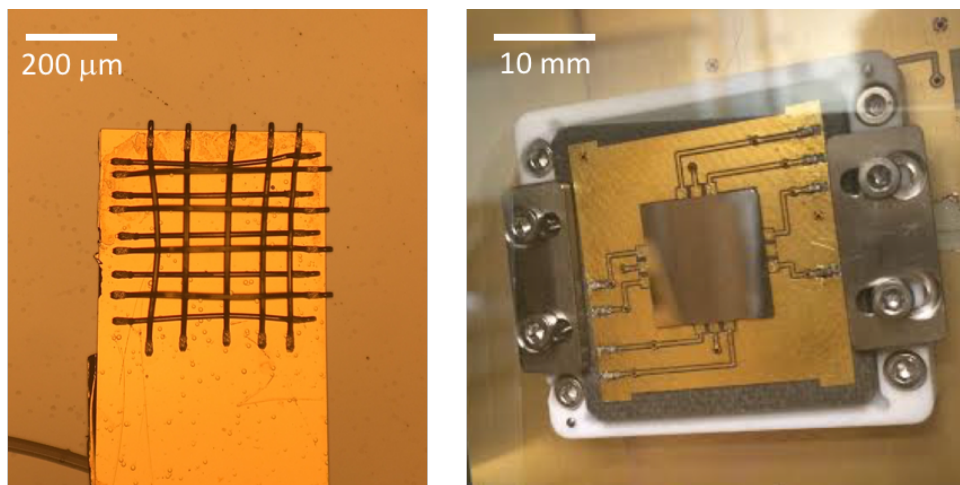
| Left: an electrical pad on the backside of the trap with Swiss crossed wire bonds, which act as a fuss button to secure the electrical bonding between the trap and the printed circuit board. Right: a silicon surface trap bonded on a printed circuit board.
